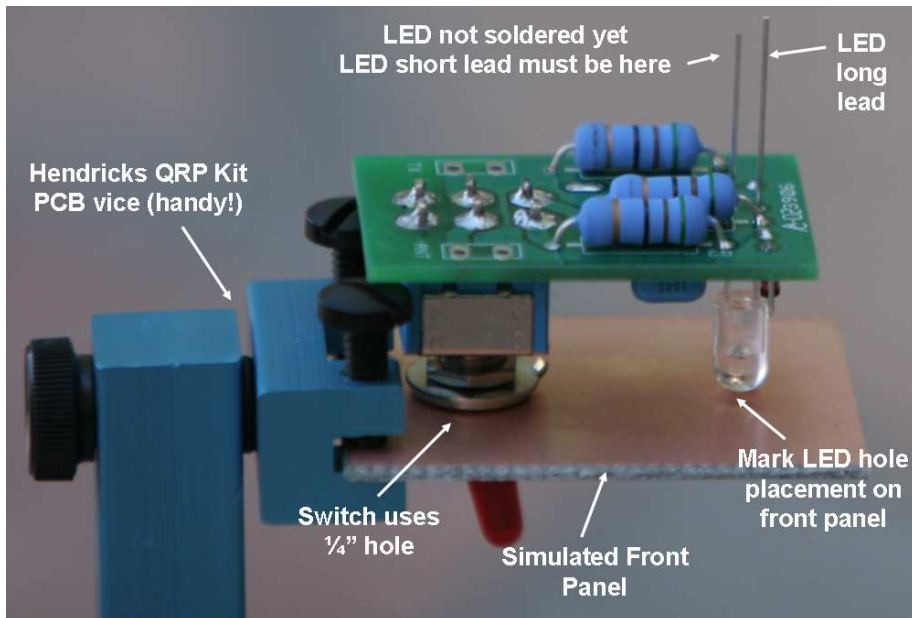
Switch mounted to simulated front panel. LED not soldered yet.
